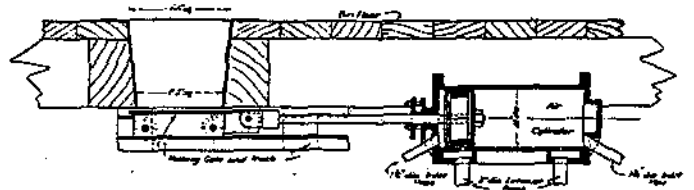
Detail of Stone Bin Gate and Cylinder.
